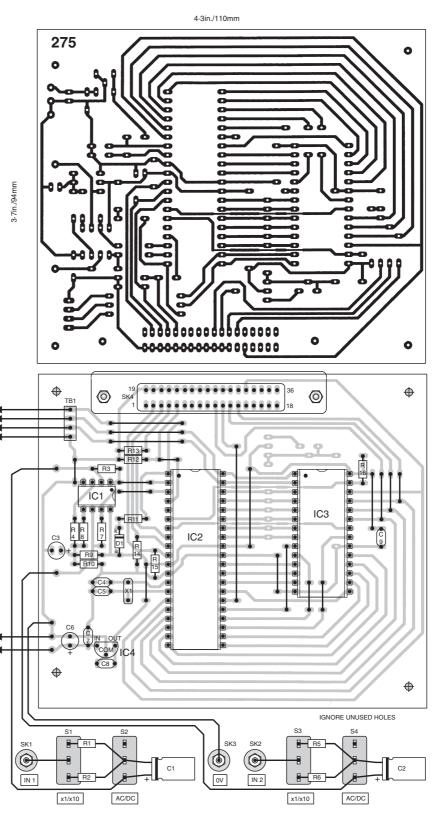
Printed circuit board full size copper foil master pattern and component layout. Ignore unused holes (see text).
